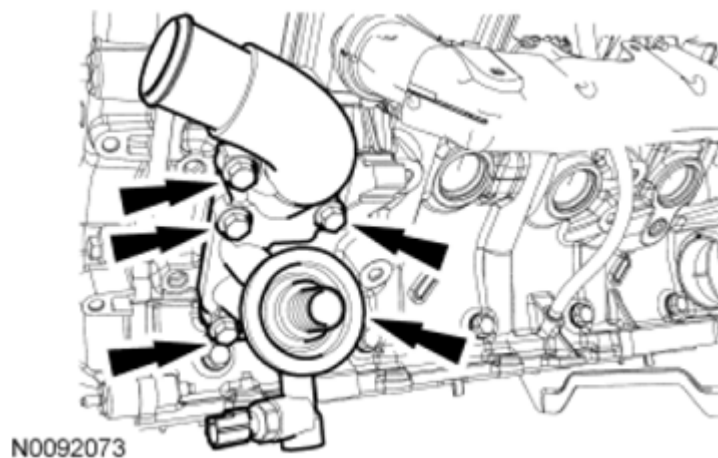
Locating Oil Filter Adapter And Mounting Bolts
